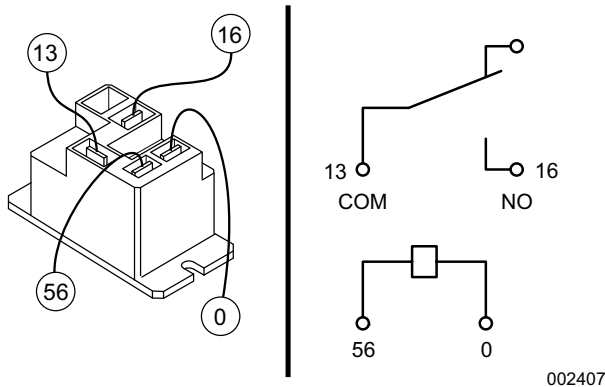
Starter Contactor Relay (V-Twin Engine) 002407
